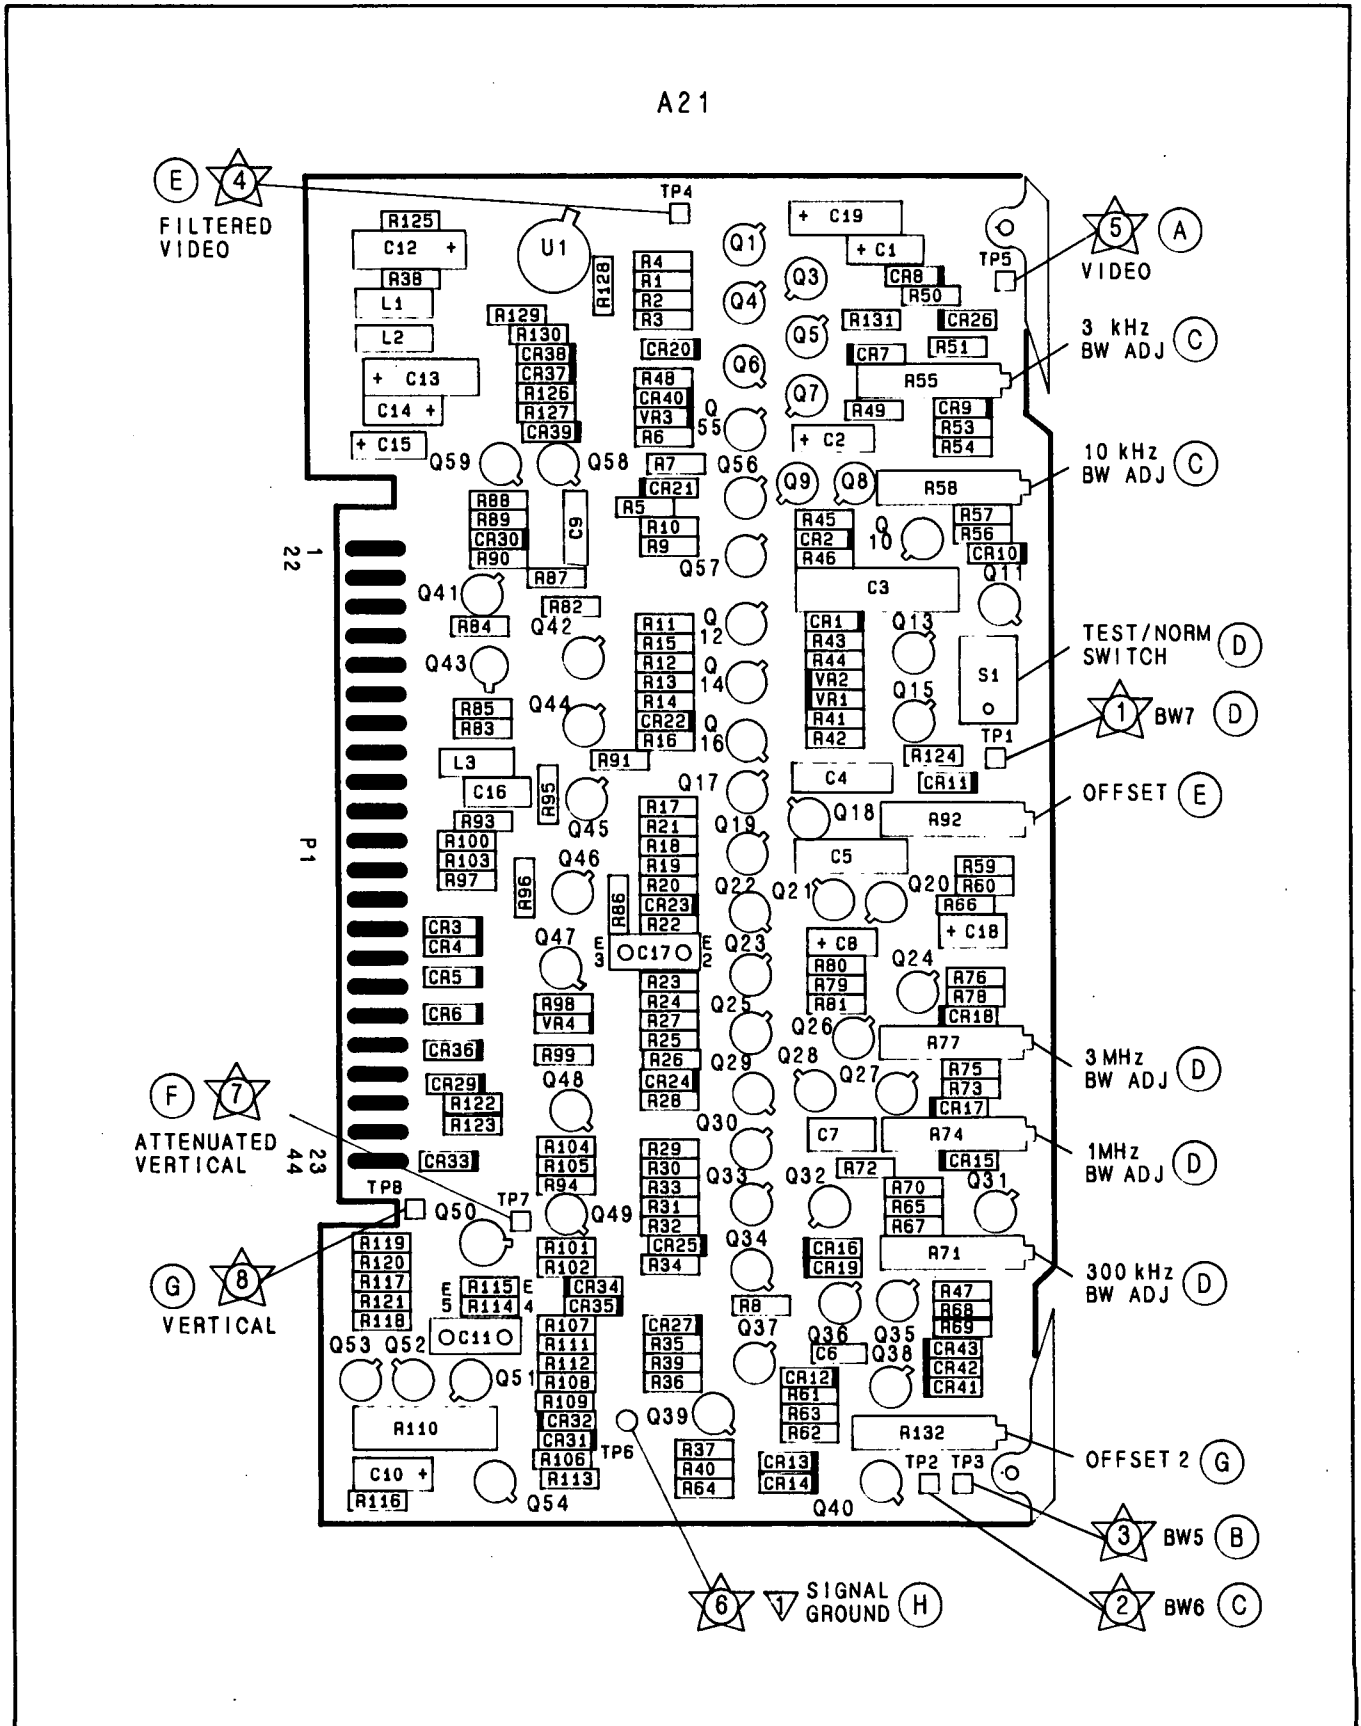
A21 Video-100 Hz Assembly, Component Locations
